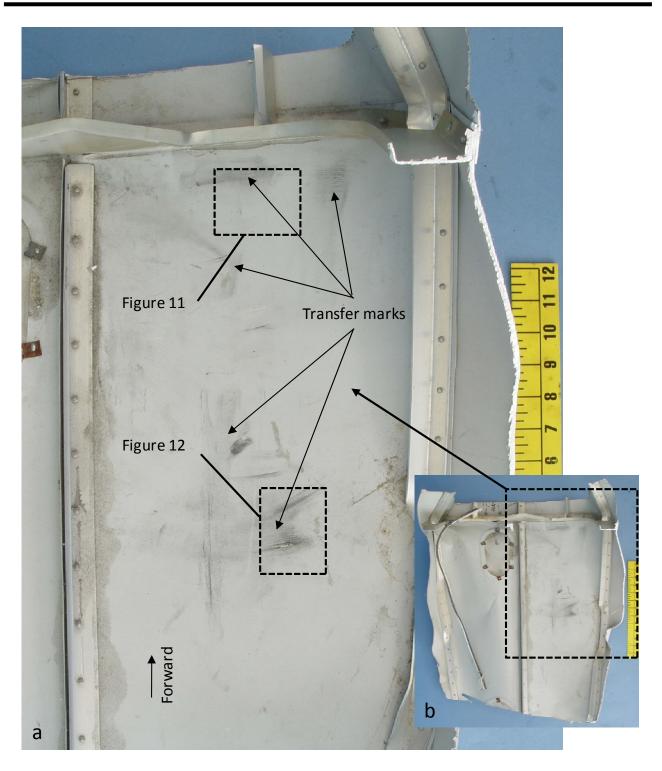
Internal surface of the bottom of the fuselage tail section right and aft of the bulkhead containing the stabilator control tube pass-thru plate. A plurality of black transfer marks are noted on the surface.
